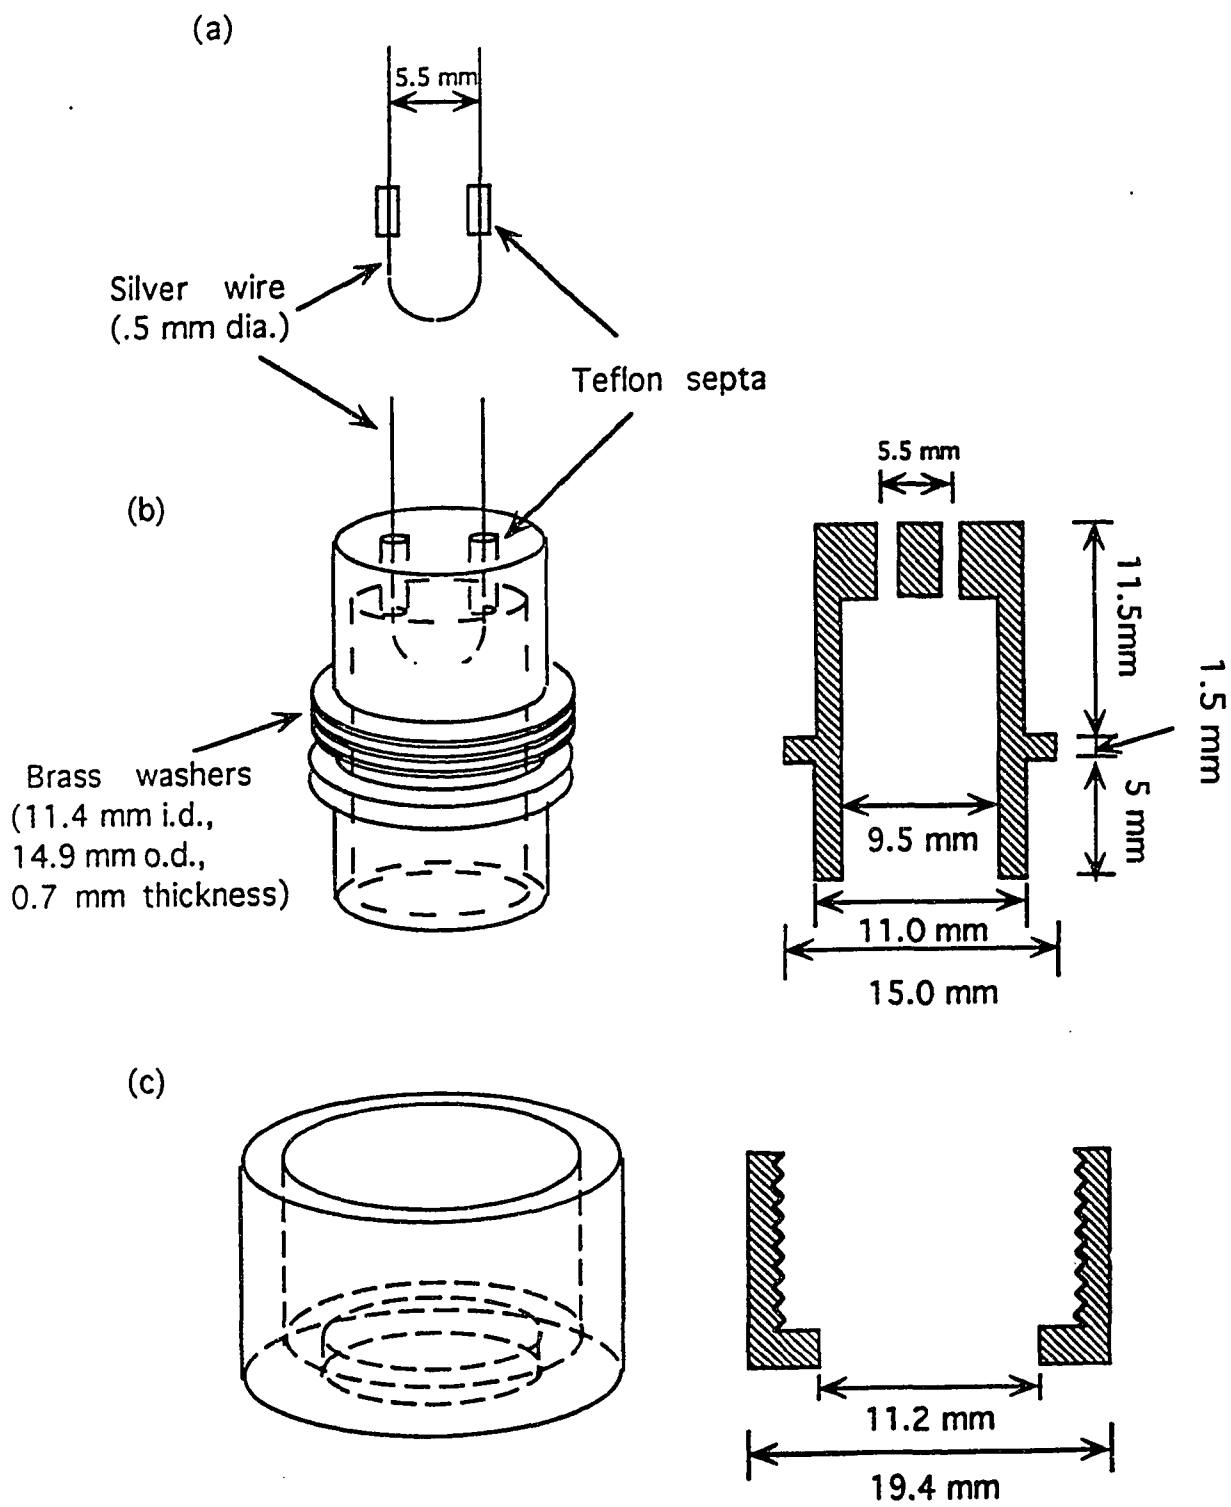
Schematic drawing of the ENDOR cavity piston assembly. (a) RF coil (b) Aluminum piston (c) Piston holder
